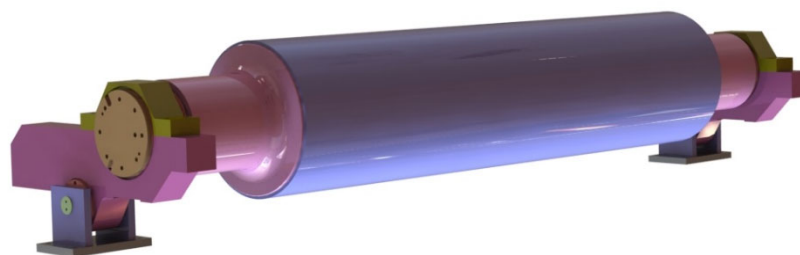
Three-dimensional assembly drawing of tension measuring roller.
